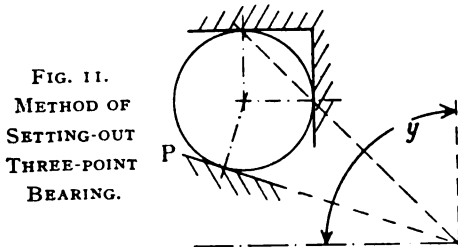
METHOD OF SETTING-OUT THREE-POINT BEARING.
